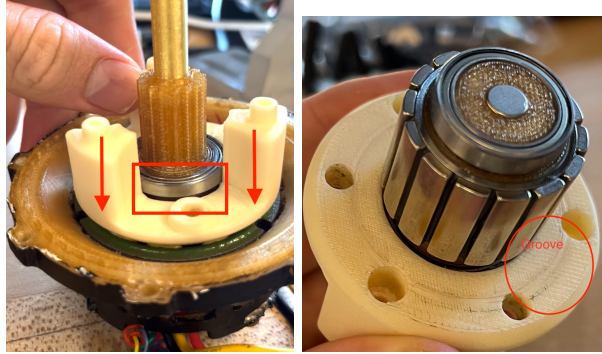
Left - Displacement of the Planet Carrier (PC) Relative to the RSG Connecting Bearing, Right - Signs of Contact between PC and Motor Stator (MS) Coils, 2024-03-04
